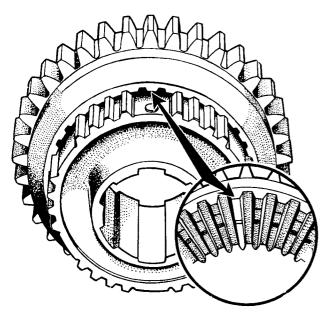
When fitting the 1st speed gear to the 2nd speed synchro sleeve the relieved tooth on the internal splines must be in line with the stop pin in the sleeve.
